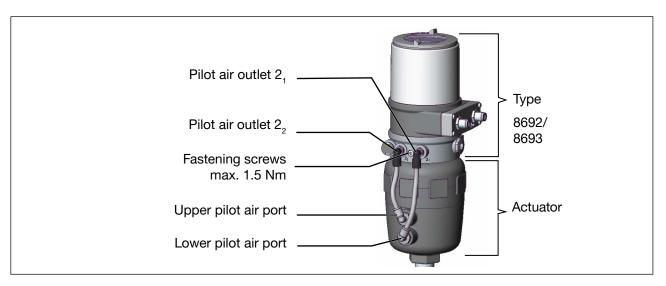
Installation of Type 8692/8693 on process valves belonging to series 26xx and 27xx
